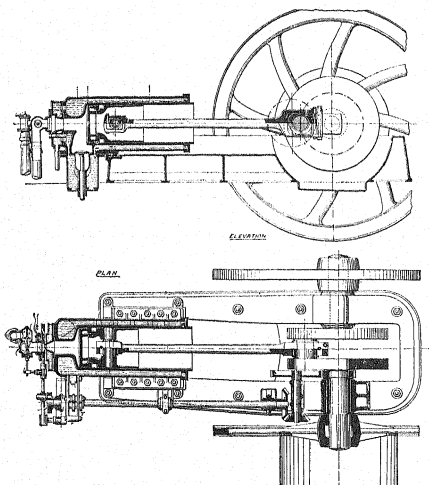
Sectional Elevation and Plan of a 100-h.p. "Simplex" Gas Engine
